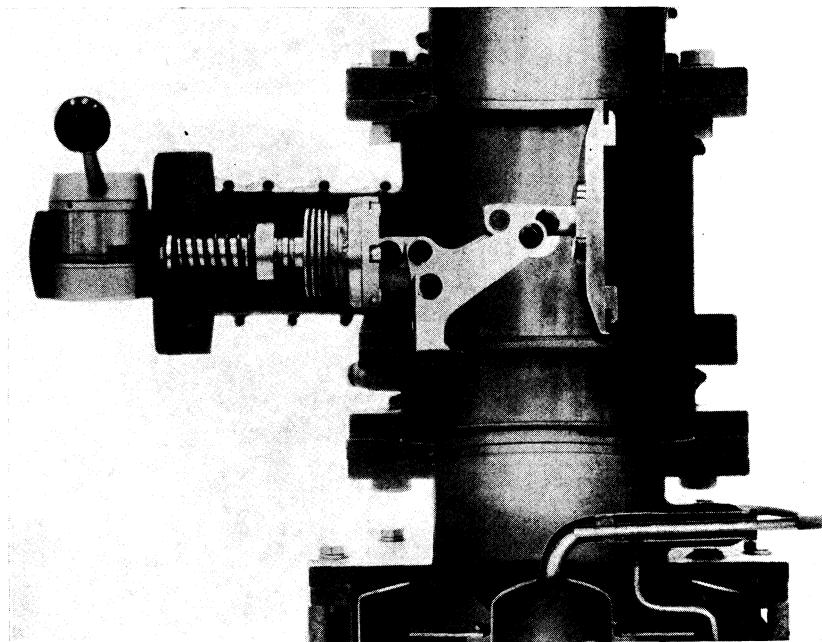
Sectional view of a hand-operated, bellows-sealed flap valve (*Courtesy of Leybold⁷⁶²*)
